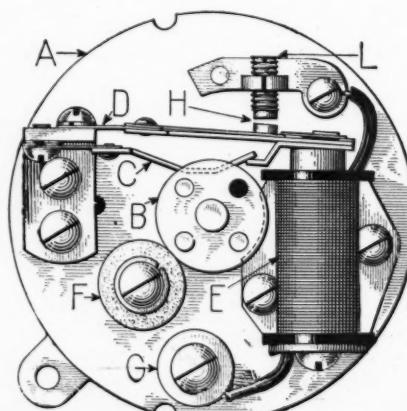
Top view showing how Vibrator-Les coil of New York Coil Co. operates
